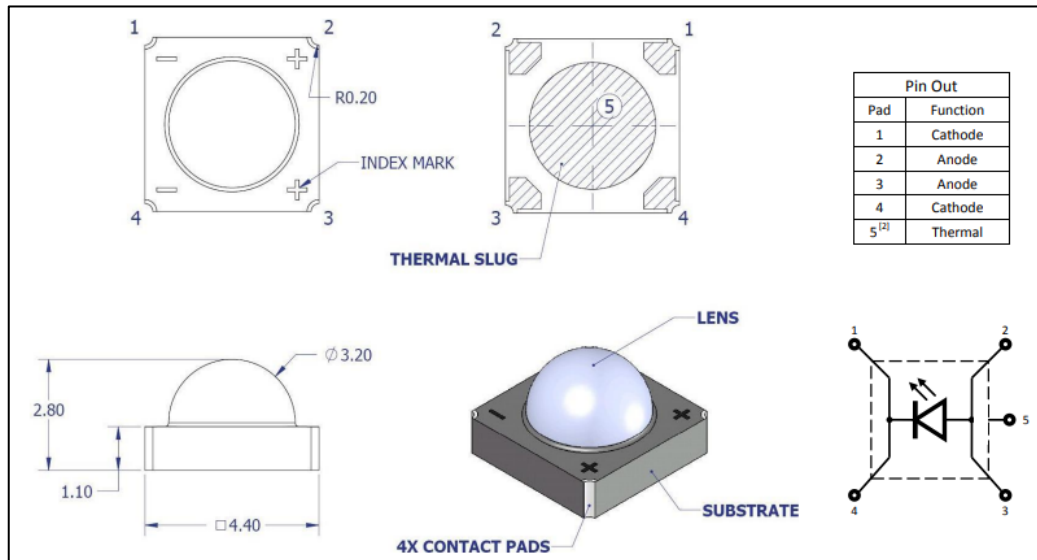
Package schematic with mechanical dimensions (mm) for 365nm UV LED emitter (LZ1-00U600) [35]
